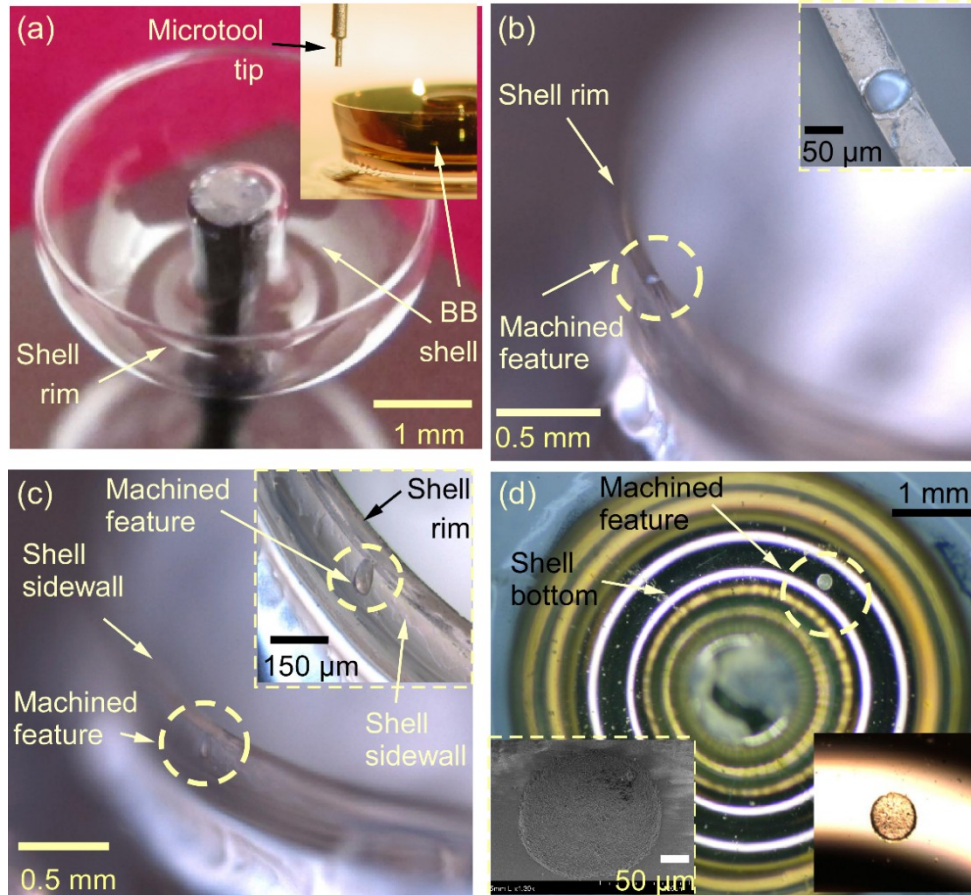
(a) A birdbath (BB) hemispherical shell of 5-mm diameter [Cho14]. The inset shows a BB shell and the microtool after machining. (b-d) Results of trimming of BB shells using HR- μ USM. (b) Trimming of the top surface of the shell rim. Average machining rate measured was 102 nm/sec. (c) Trimming of the outer sidewall of shell. Average machining rate measured was 84 nm/sec. (d) Trimming of the bottom surface of the shell. Average machining rate measured was 60 nm/sec.
